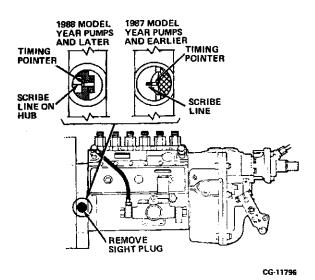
Injection Pump Timing Marks (Model PES6A pump shown)
